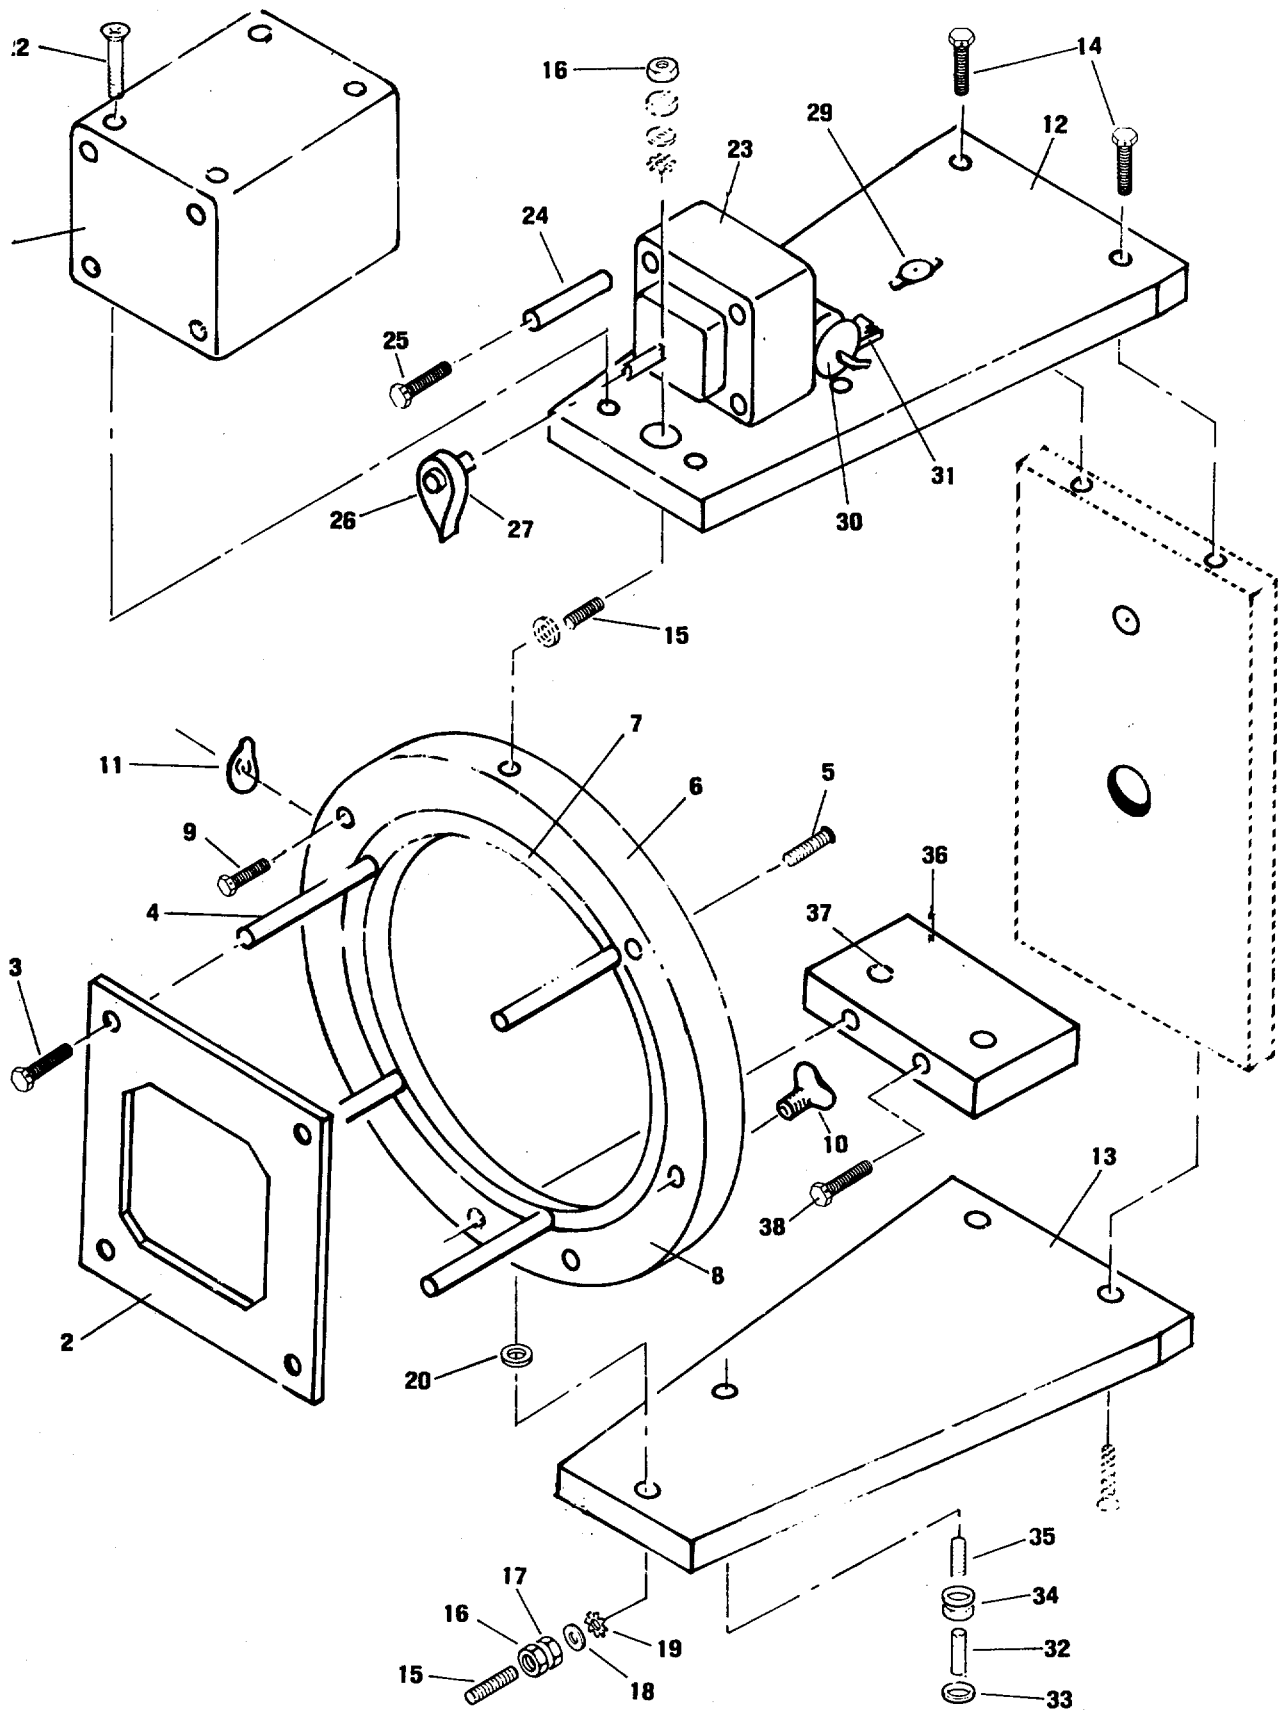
Gyro Tester Assembly (Sheet 1 of 3)
